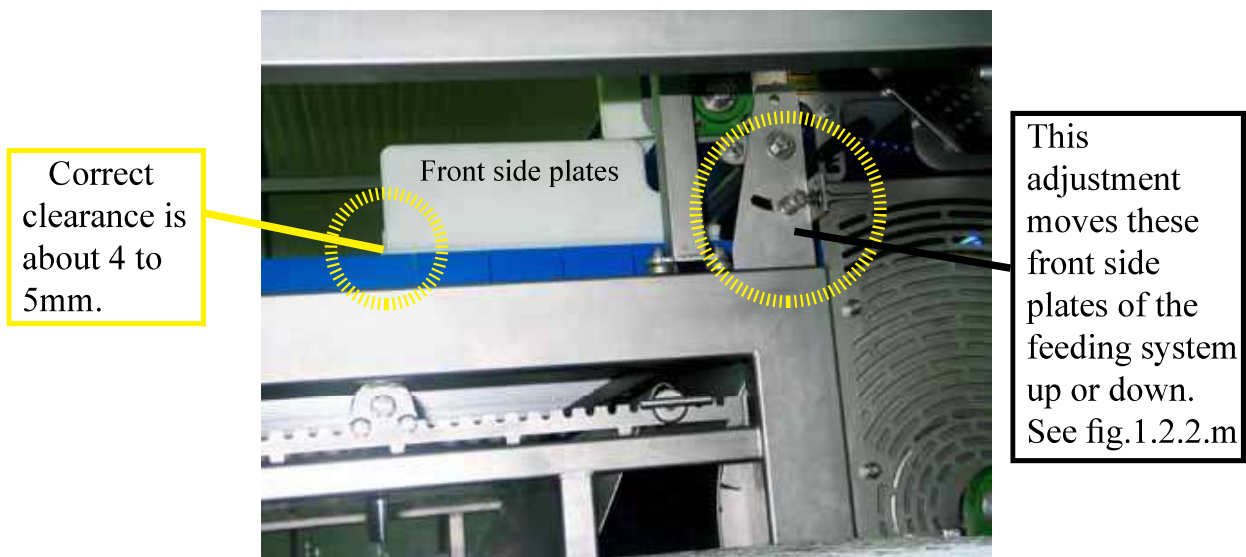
Side-view of Style feeding system showing front plates on top of grading chains.
